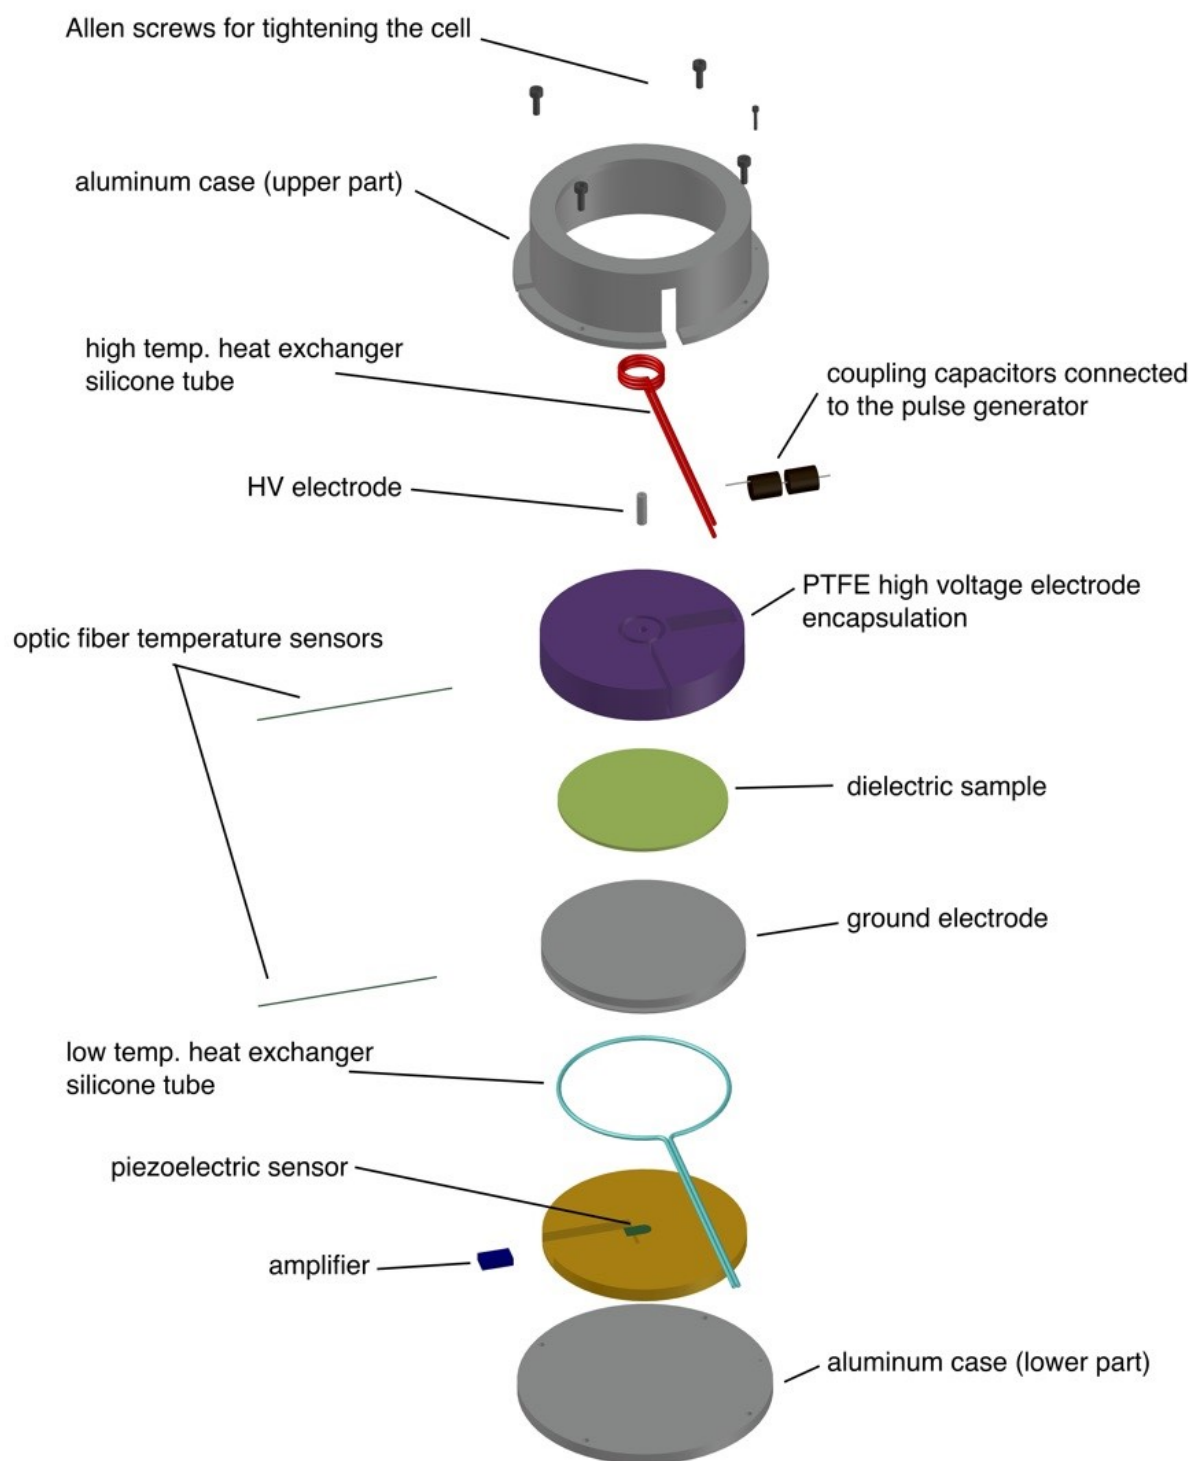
3D view of the PEA cell assembly – exploded view
